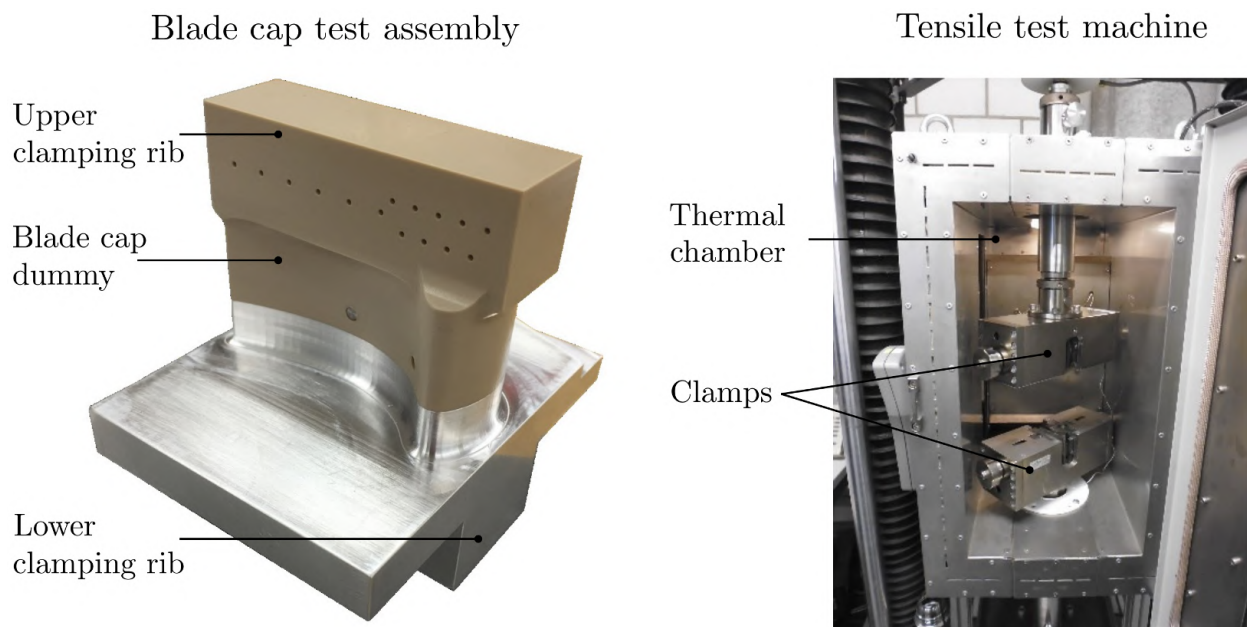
Blade tip cap dummy setup for mechanical integrity tests: tip cap dummy (left) and tensile test machine (right, IVP ETH Zurich [125])
